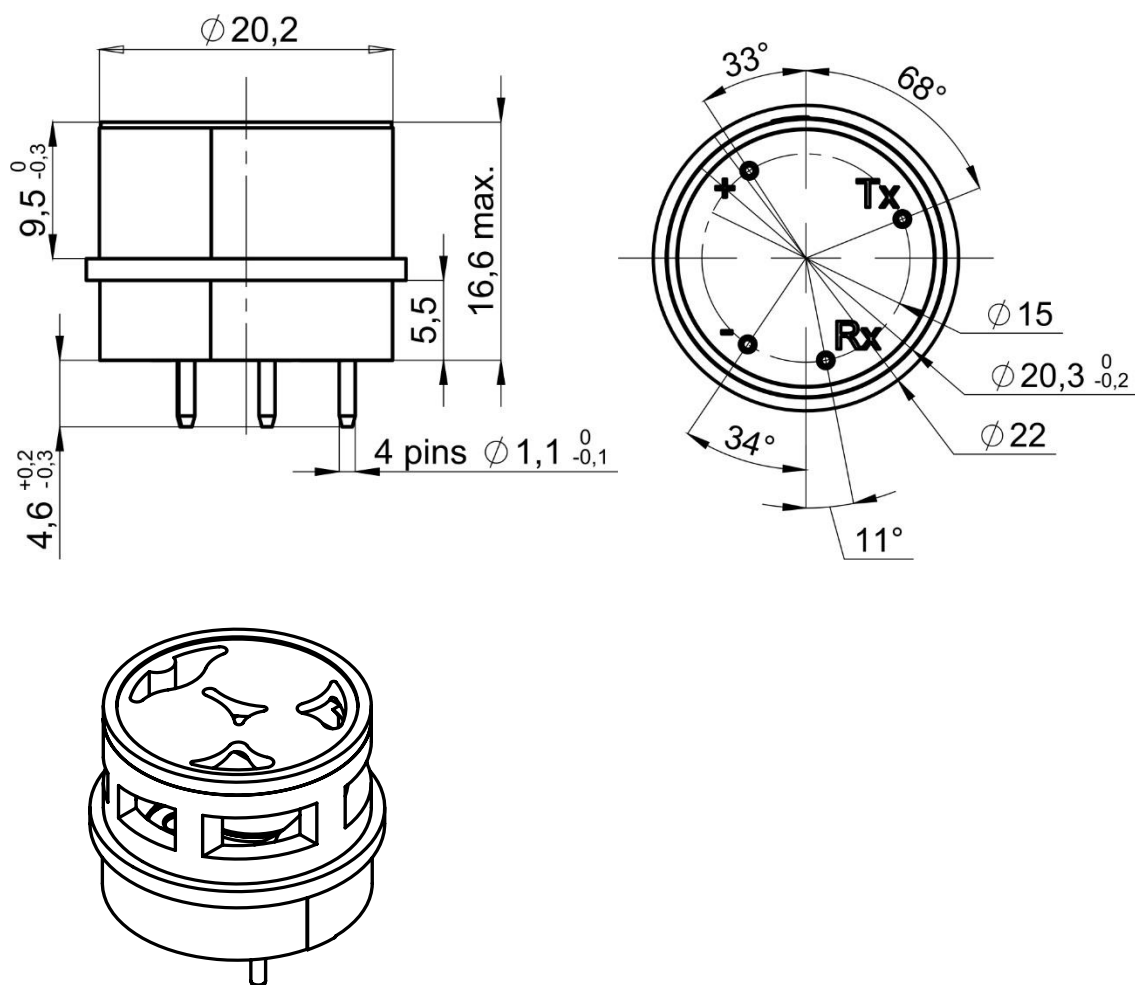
MIPEX-02-B-C-2.1 A (housing type "2") overall dimensions in millimeters
